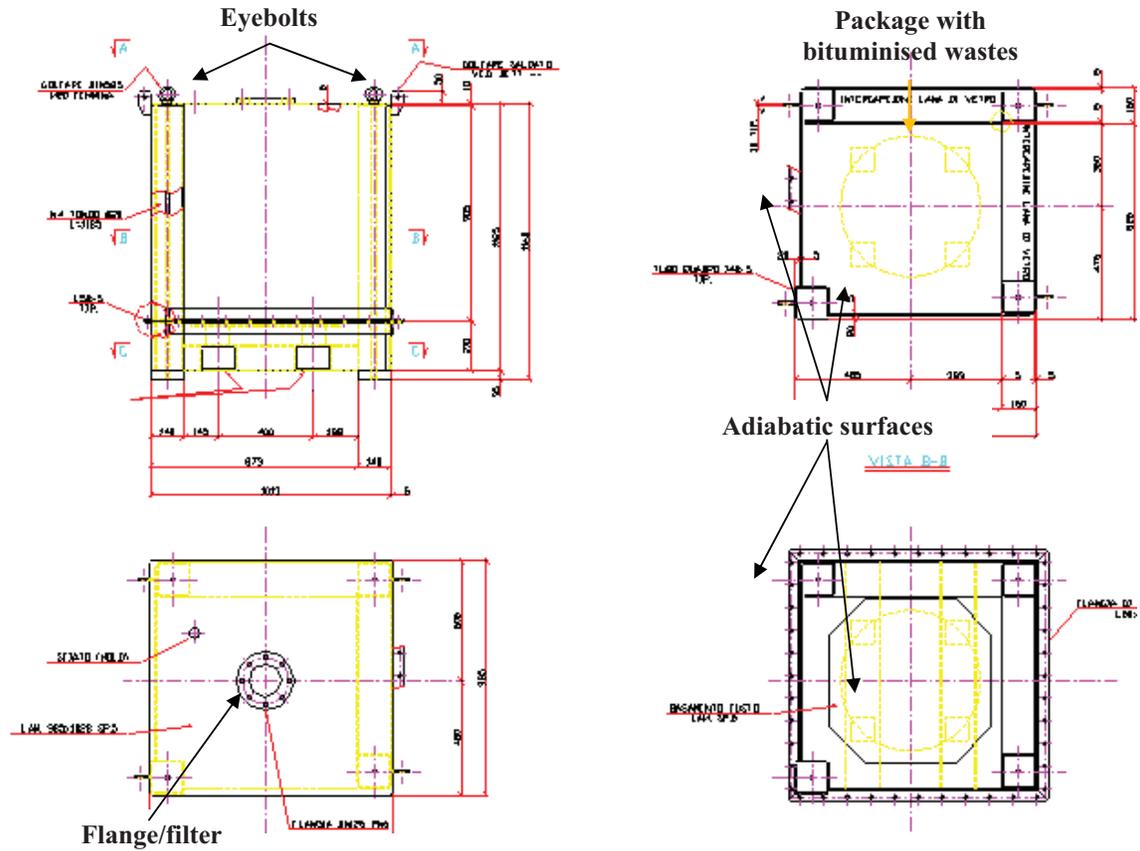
Drawings of the packaging mock-up (Lo Frano et al., 2015).
